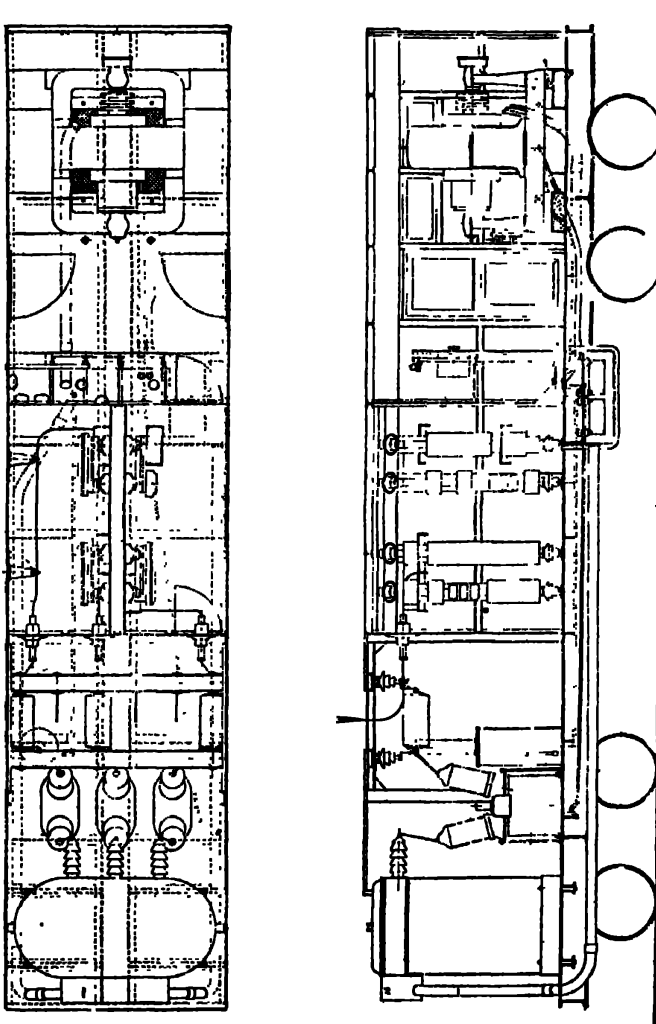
Portable Railway Substation, 35,000-Volt Primary, Berkshire Street Railway Company
